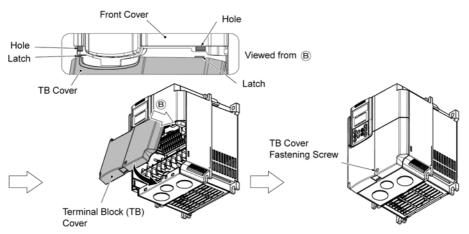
Mounting the Covers (FRN015F1S-2U)
